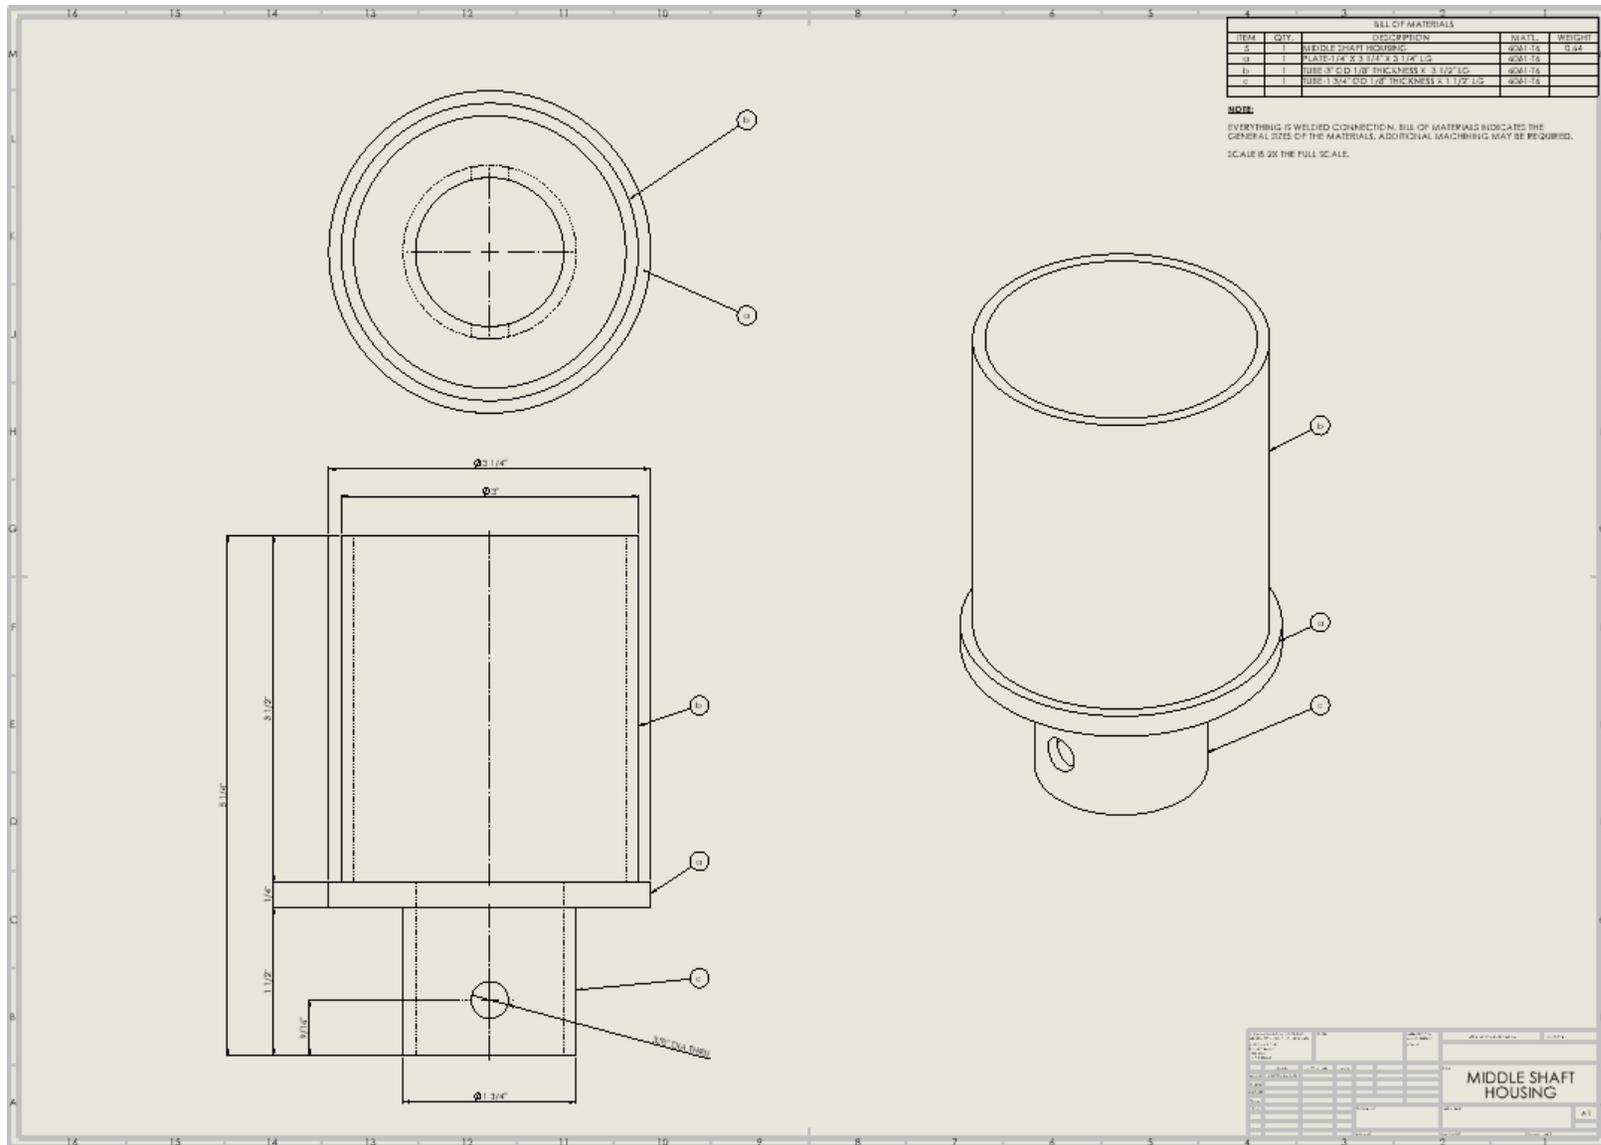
Fabrication Instruction Sheet for Middle Shaft Housing
